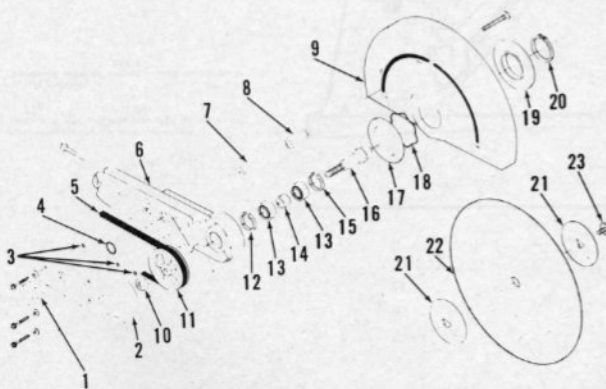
Exploded view of saw arm assembly used on Models DM20 and DM50.
